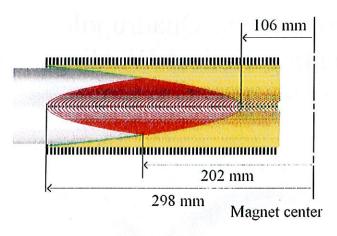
Side view of the end region of the quadrupole magnet winding.
